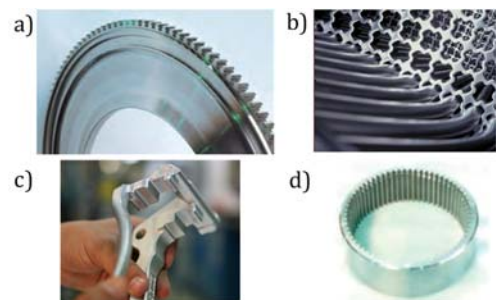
Examples of broached components: a) fir tree turbine disc, b) quatrefoil shaped hole of tube sheets, c) brake caliper brackets and d) ring gear of an epicyclic gear train.
